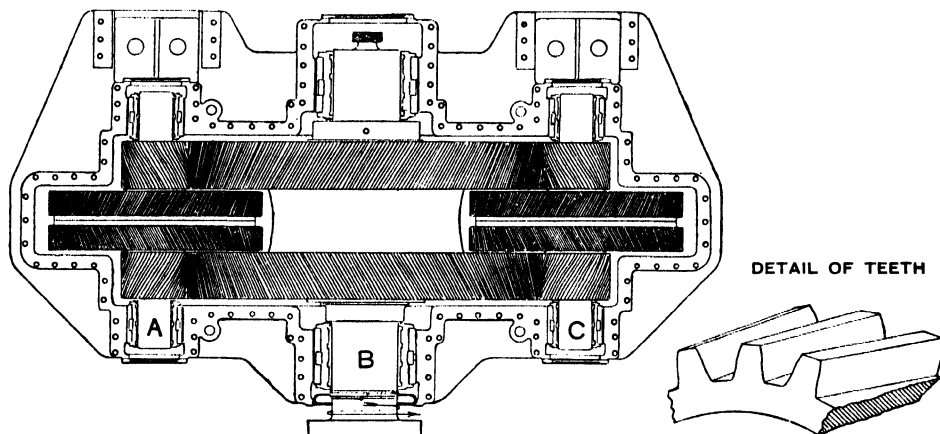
Parsons' Turbines for a Single-screw Cargo Boat: plan view of double reduction helical gearing
